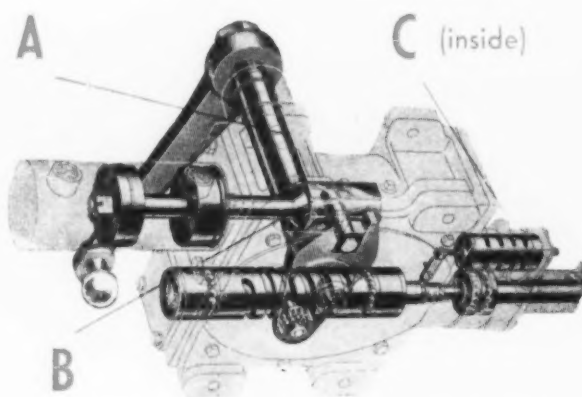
Skeleton of the recently developed hydraulic type Ross steering gear. In addition to other components photo shows A, B and C described in text.
